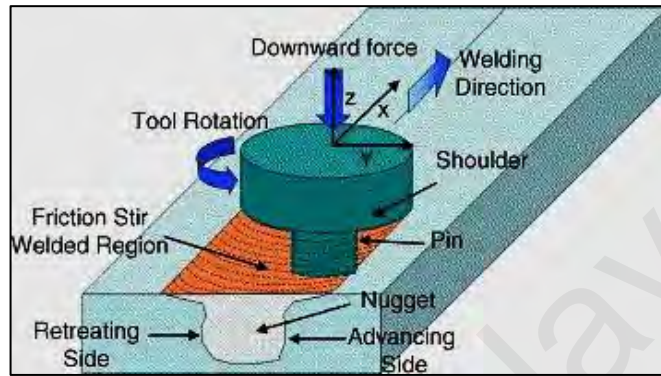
Basic schematic of the friction stir welding process (Mishra & Ma, 2005b)
